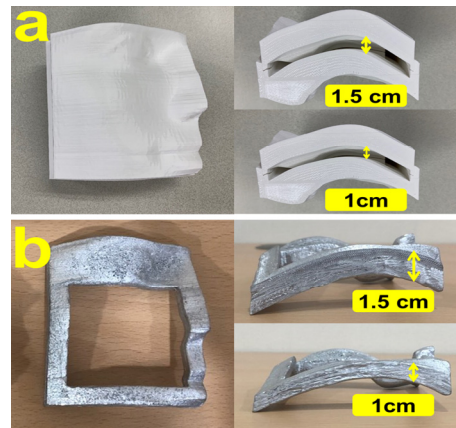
(a) Two types of patient customized shielding molds printed using a 3D printer, (b) Two types of patient customized shielding block(1, 1.5 cm)
